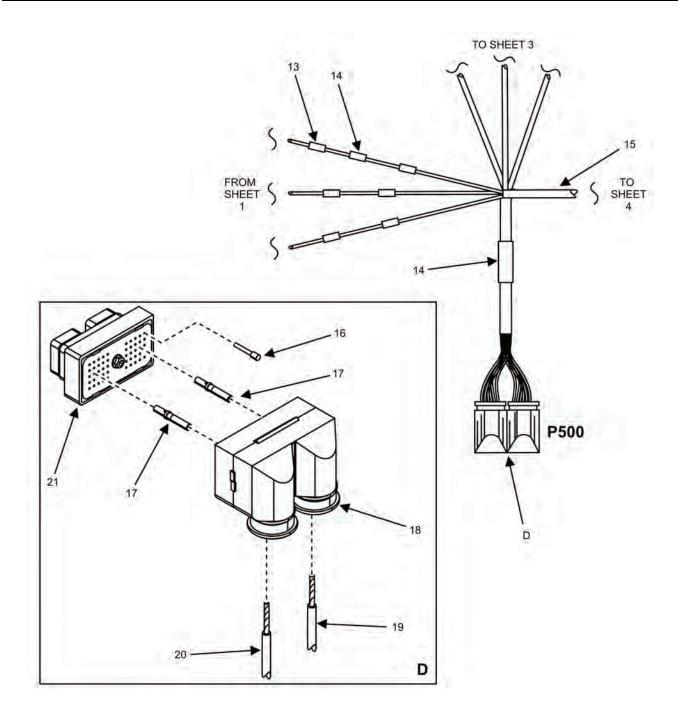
Engine Wiring Harness (Sheet 2 of 15).
